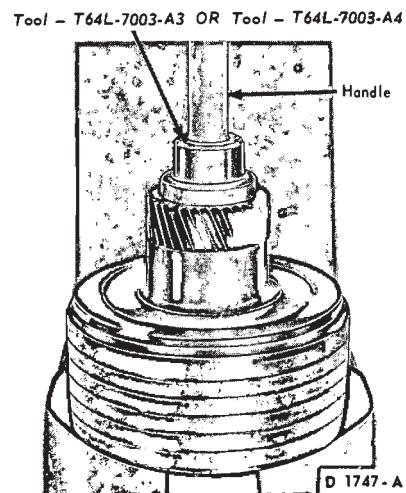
Installing Rear Clutch Sun Gear Bushing
